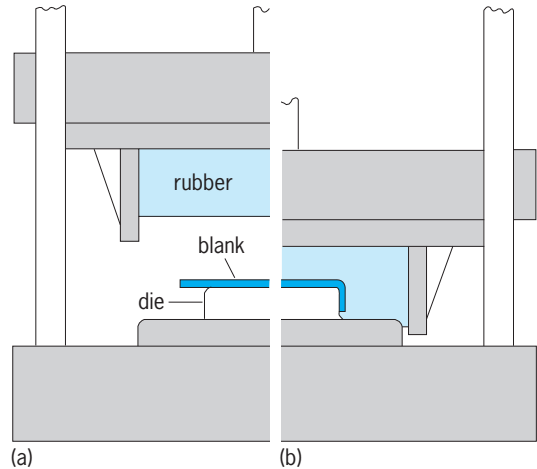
Guerin process, the simplest rubber forming process. (a) Before forming. (b) After forming.
